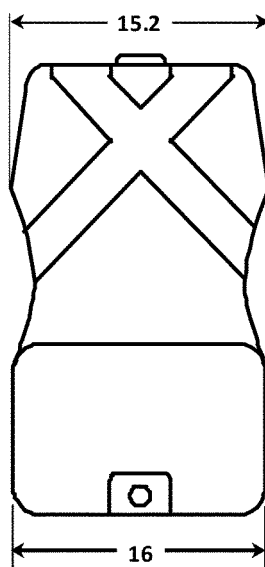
(a). Front view of water dummy. All dimensions are in centimeters.
